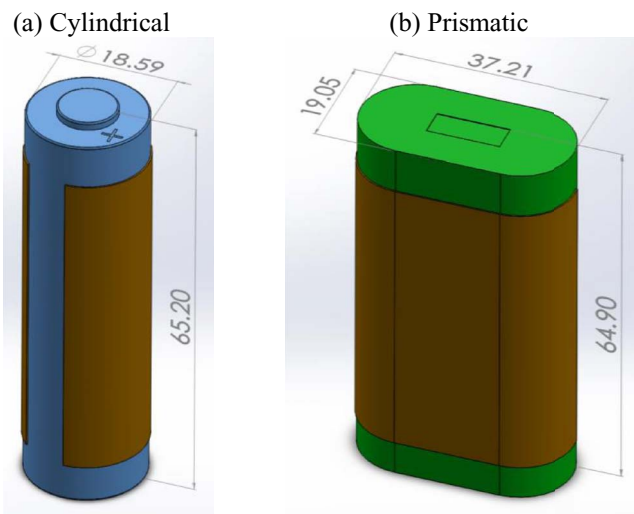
(a) Cylindrical spiral-wound and (b) prismatic spiral-wound test cells. Dimensions shown in millimeters.
